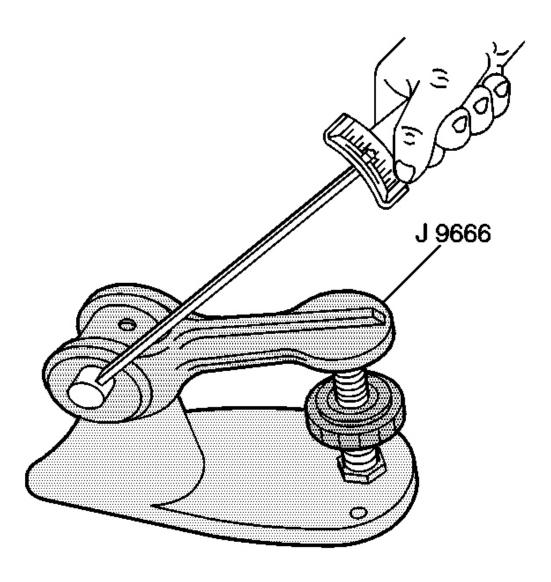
Measuring Valve Spring Tension Courtesy of GENERAL MOTORS CORP.
